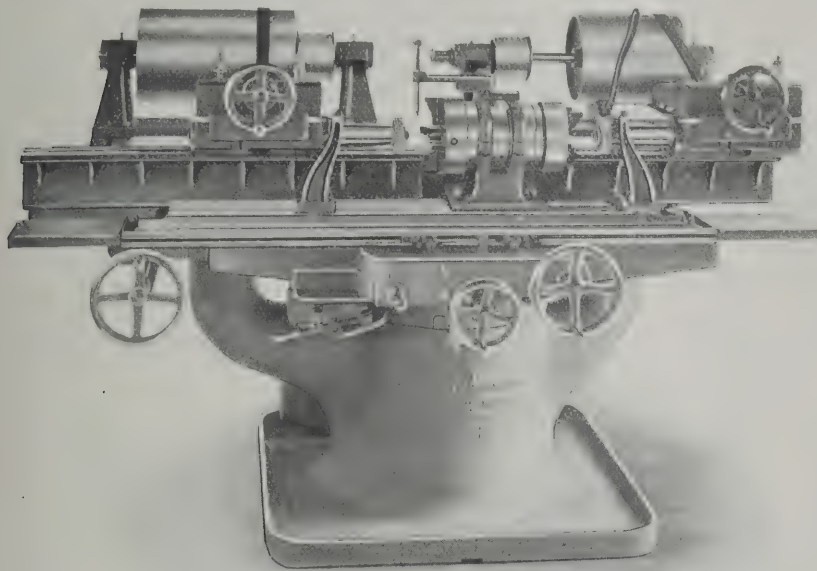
Bath Duplex Internal Grinding Machine, having Two Wheel-spindle Heads
